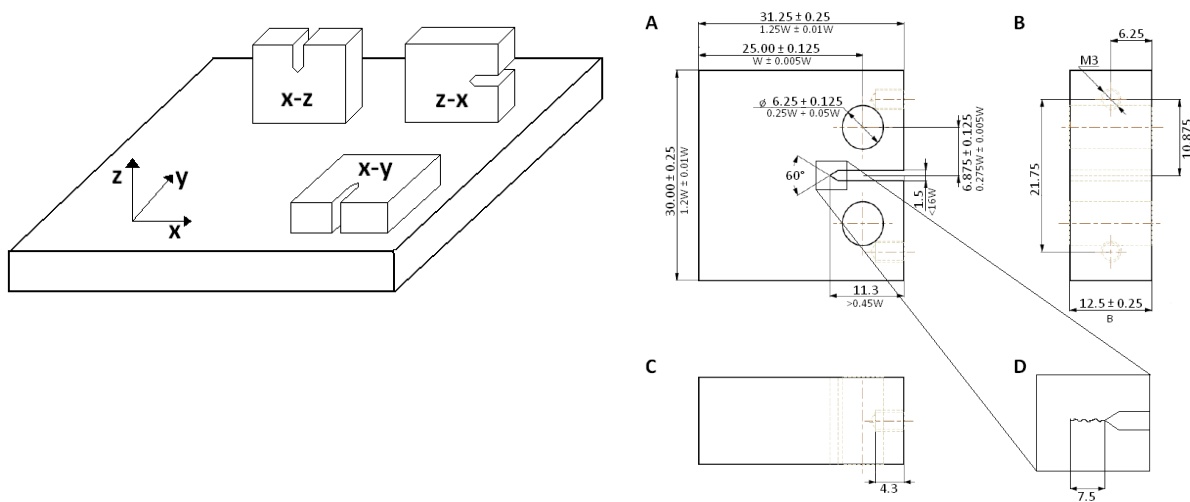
(a) Fracture toughness and crack growth rate sample orientations. (b) Dimensions of fracture toughness samples. Fatigue crack growth rate samples have a thickness B equal to 6.25 mm instead of 12.5mm. The remainder of the dimensions are identical.
